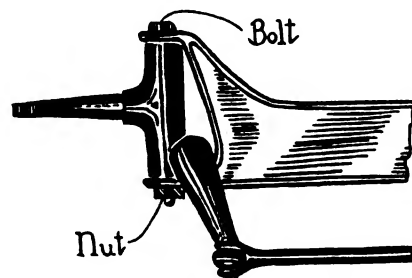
REPAIRING A STEERING KNUCKLE BREAK
